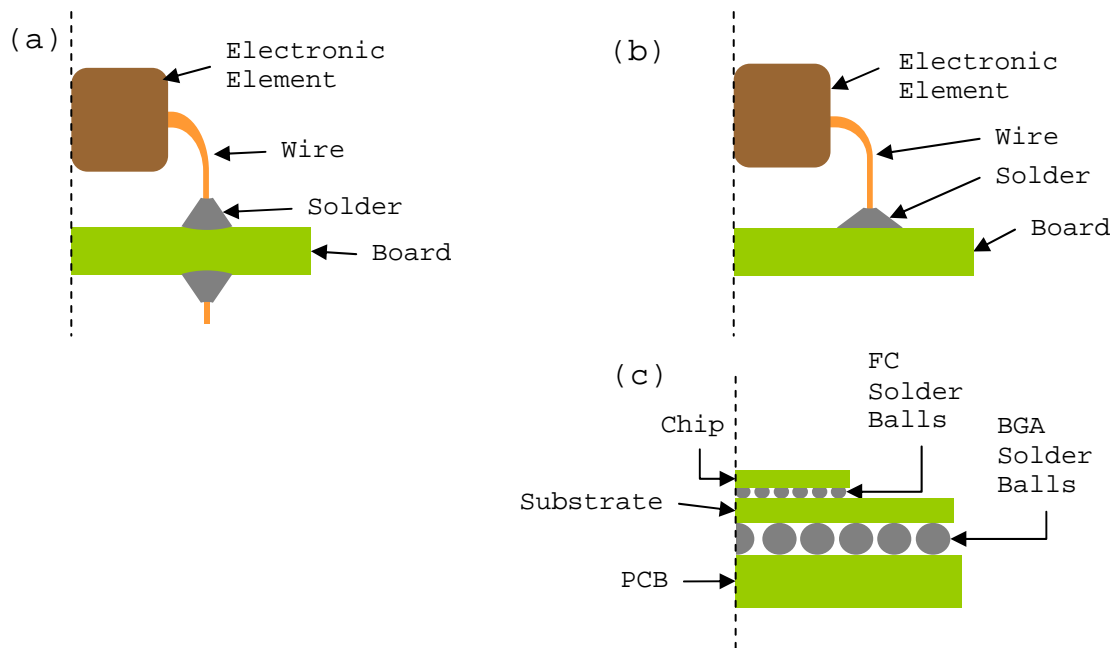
Examples of solder joining using (a) through-hole, (b) wire-bonding and (c) FC and BGA surface mounting.
